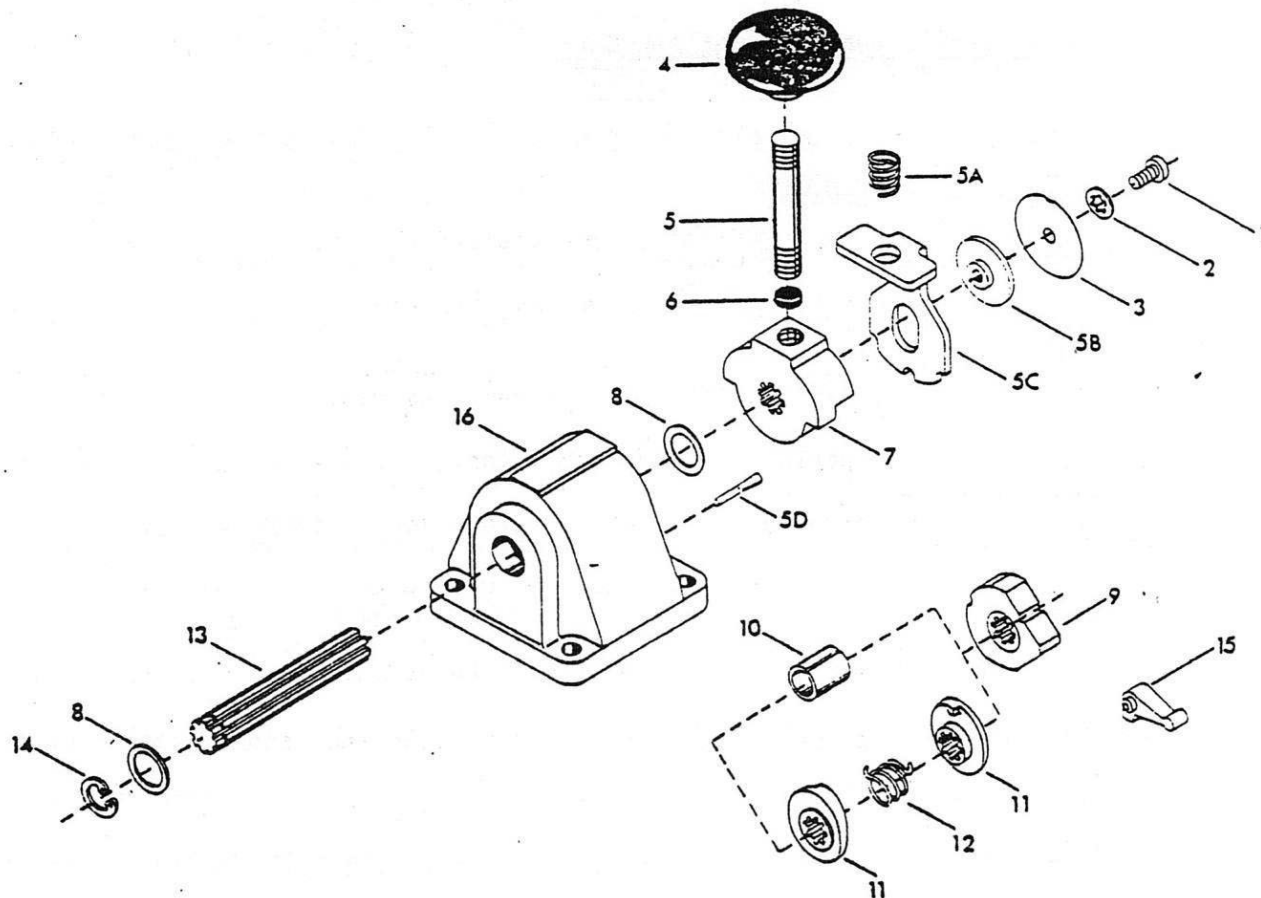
HA-1 PILOTAIR Valve Cam Housing Exploded View
